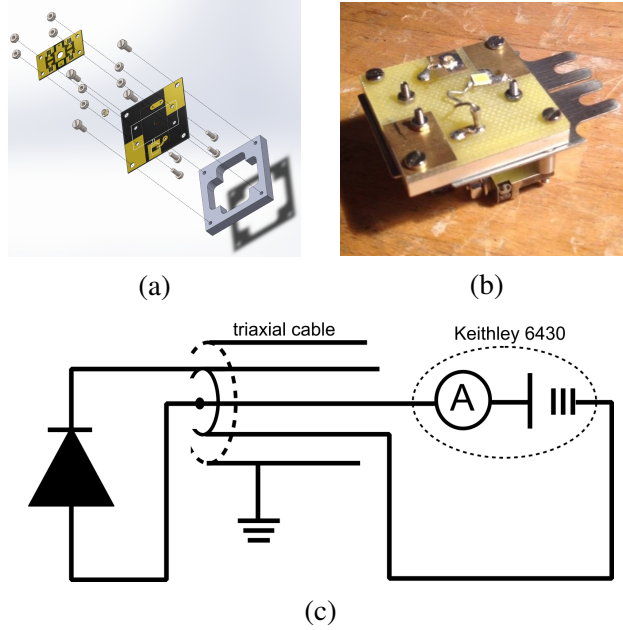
Design (a) and illustrative photo (b) of the PCB prepared in order to interface the sample holder used at the BEAR beamline and the PCB used to carry the devices.
